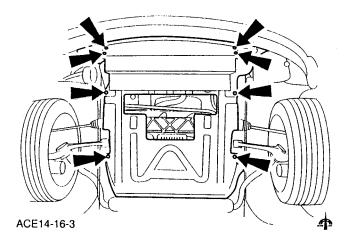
Retaining bolts of lower engine cover. (Escort shown)
